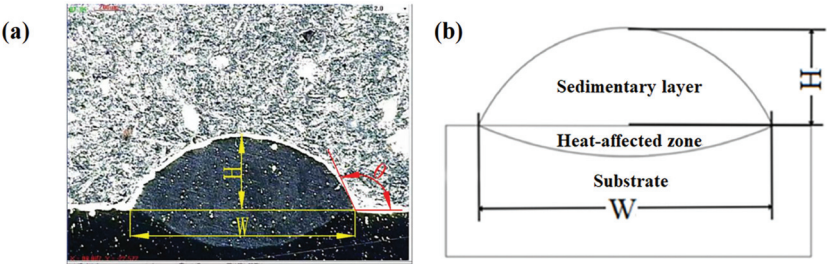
(a) Cross-sectional morphology of a single-layer, single-pass object formed through laser direct deposition. (b) Theoretical cross-sectional morphology of single-layer, single-pass laser direct deposition molding.
